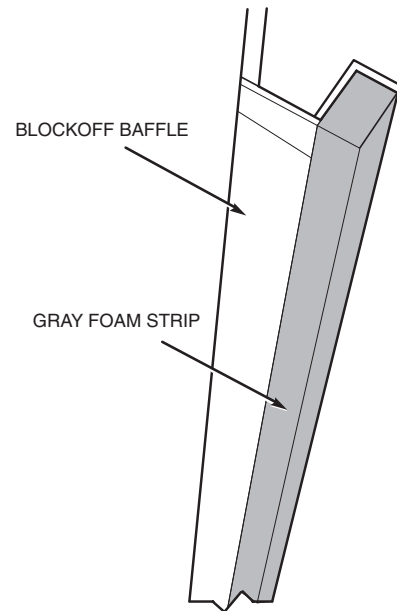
Adding Seal Strip to Sides of Hood Top Mounting Flange
